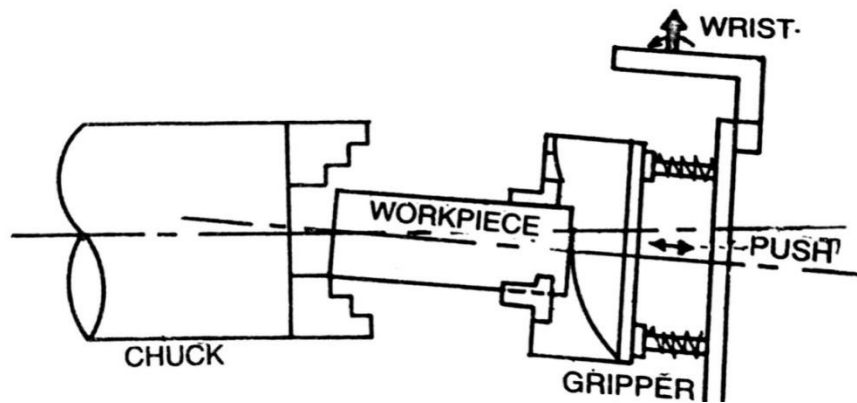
(a) indicates a gripper attempting to insert a cylindrical work piece into chuck
